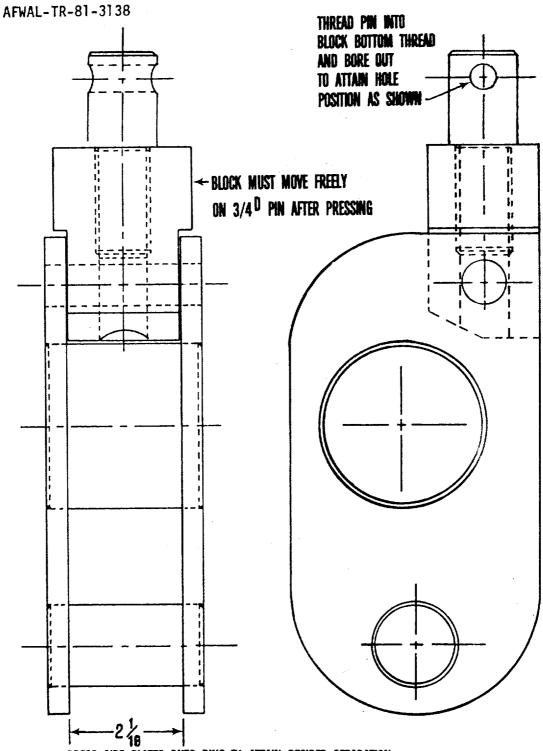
Double Pin Jaw - Attachment Block (Sheet 5 of 7)
